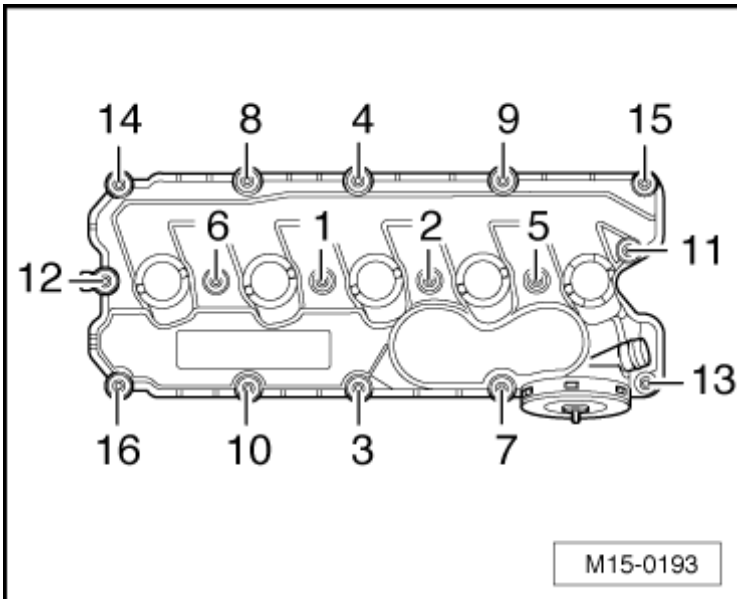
Removing Bolts For Cylinder Head Cover In Sequence
